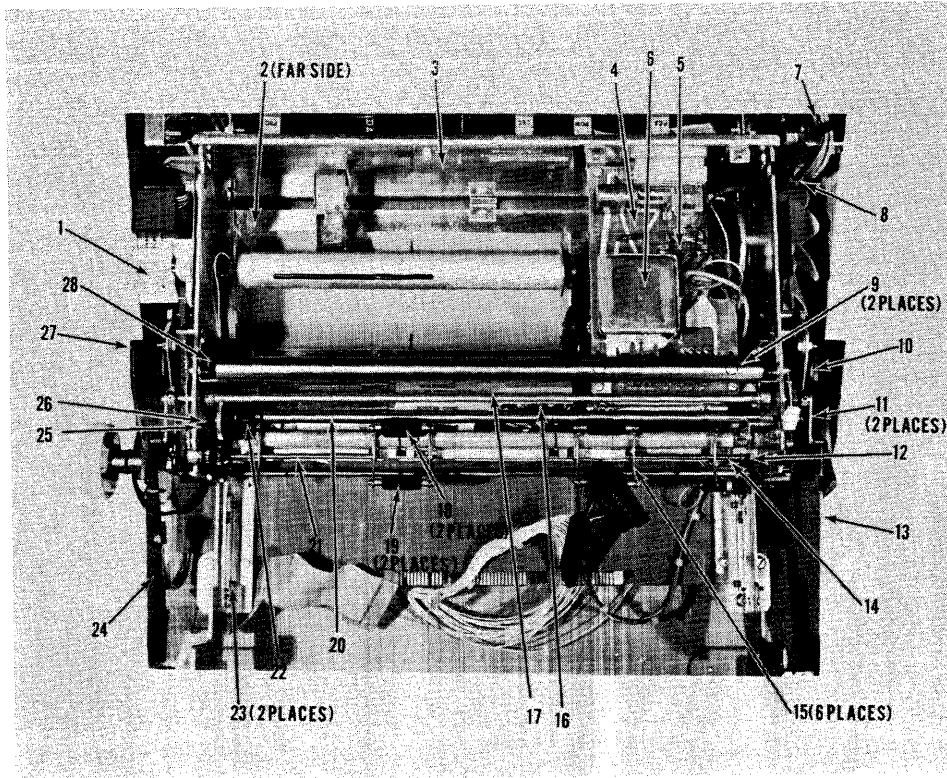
Frame Assembly for TermiNet 300 C or D Printer
